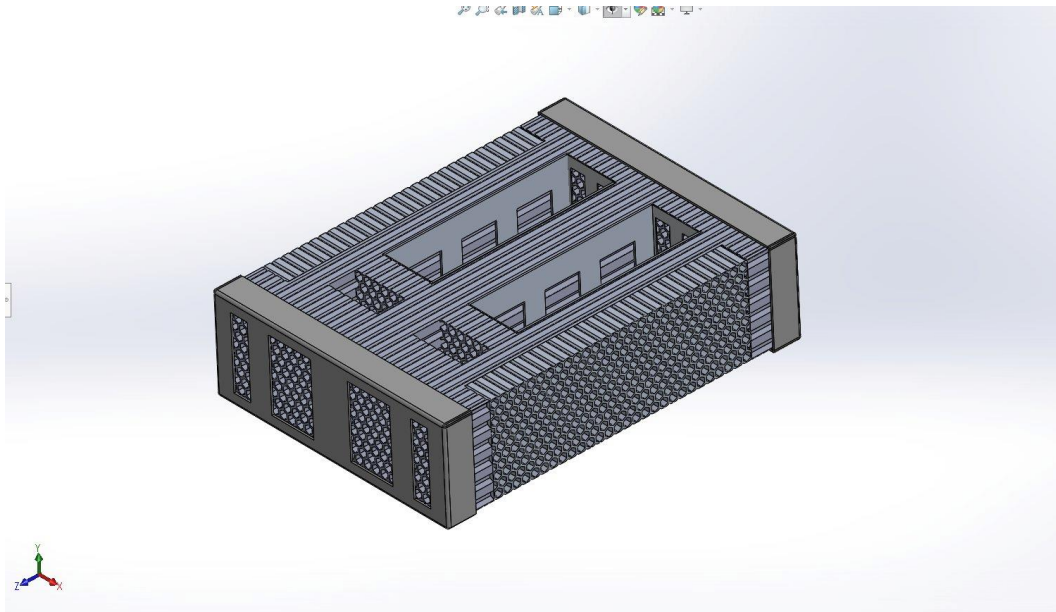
Isometric view of the honeycomb battery pack enclosure assembly (SolidWorks model)
